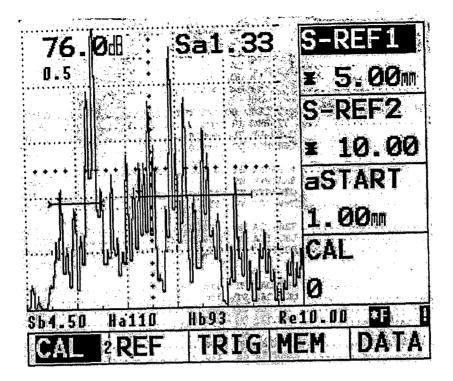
Ultrasonic echo pattern for MIG 21 Sintered brake pad
